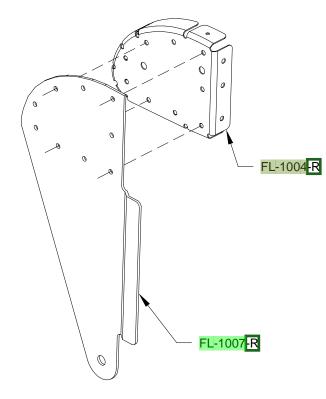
RIGHT HINGE PAIR RIB SUBASSEMBLY
